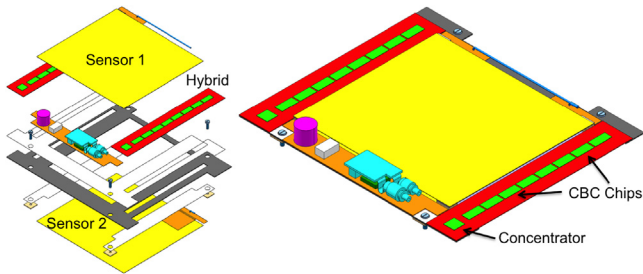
Drawing of the “2S-module”. On the left side the component parts of the module are shown. On the right side the module is assembled. It consists of two strip sensors with the hybrids at the edges [2].
